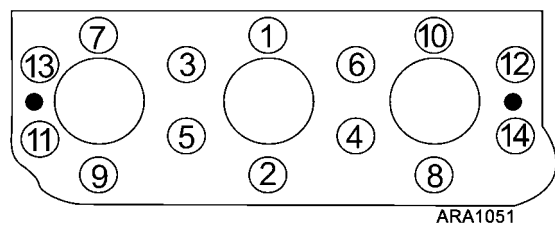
Cylinder Head Bolt Torque Sequence for Three Cylinder Engines
